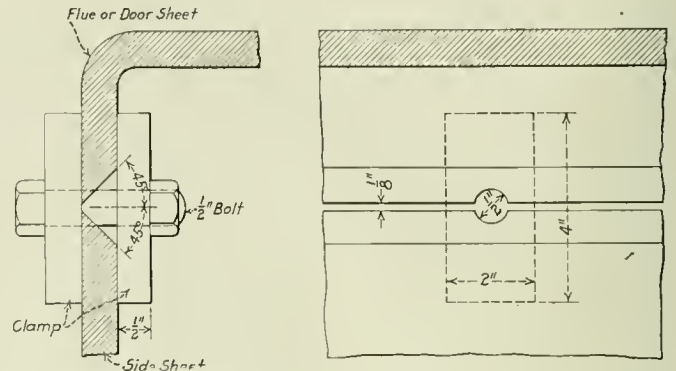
Clamp for Holding Fire Box Sheets in Line when Welding
